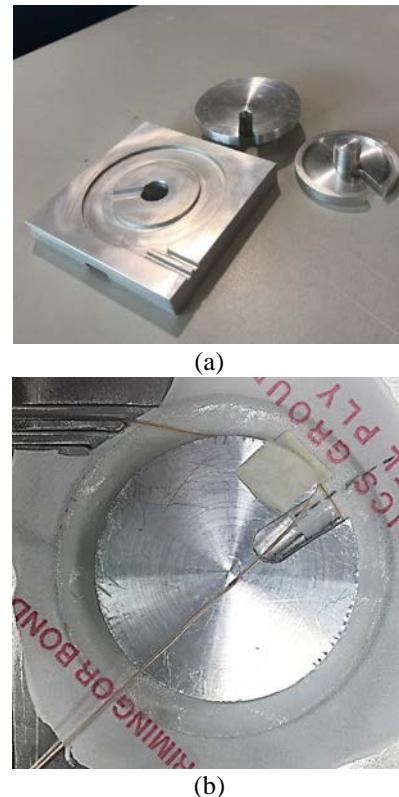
Mold designed and manufactured to manage FOs positioning (a); view of the fiber routing around the mold (b).
